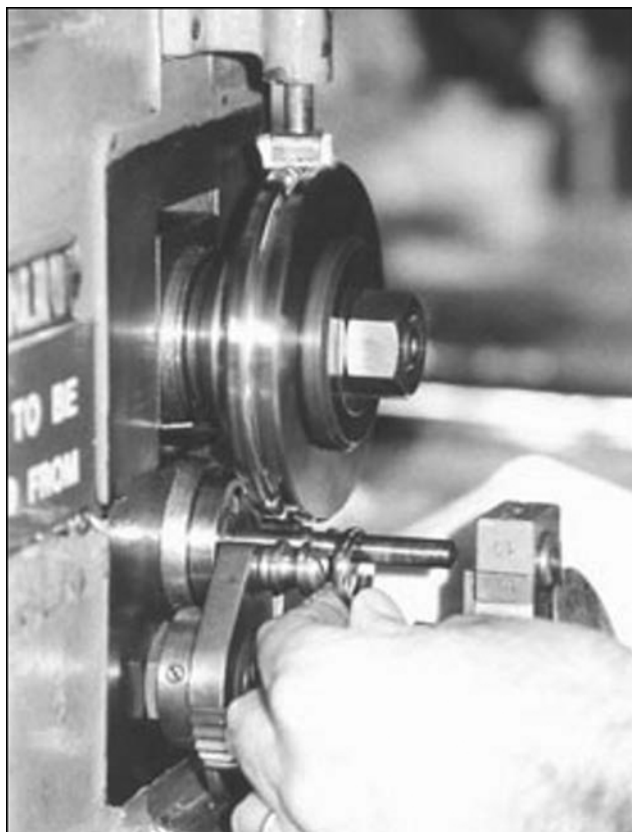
Production of carat gold rings on a Karl Klink ring rolling machine
